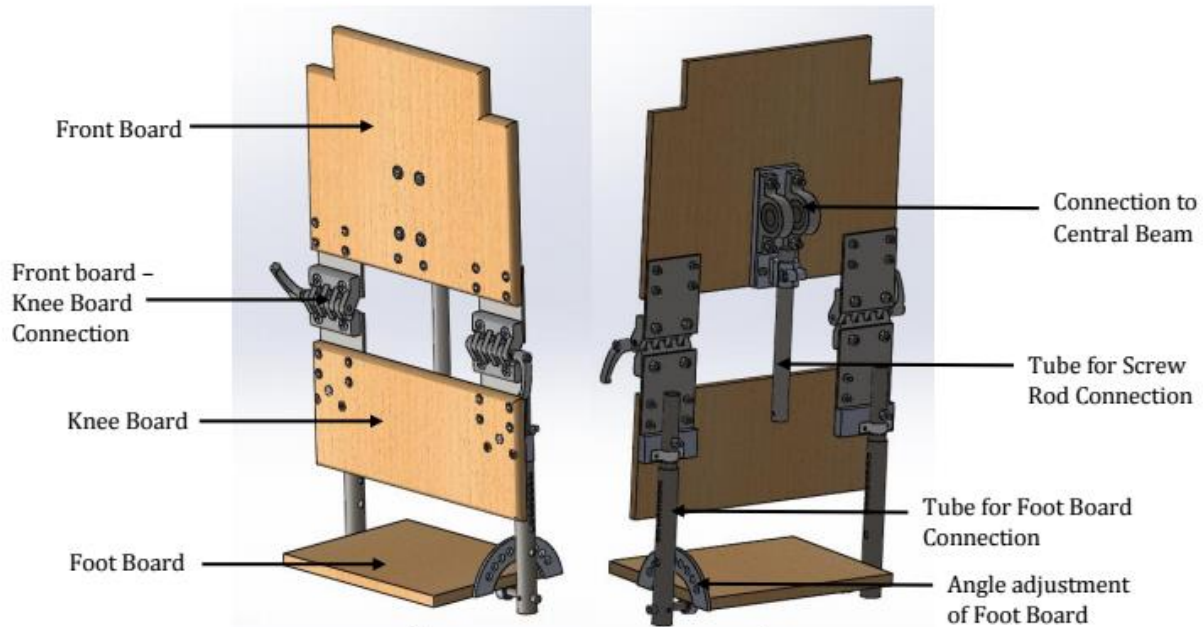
Front Board, Kneeboard, Footboard Assembly [7]
